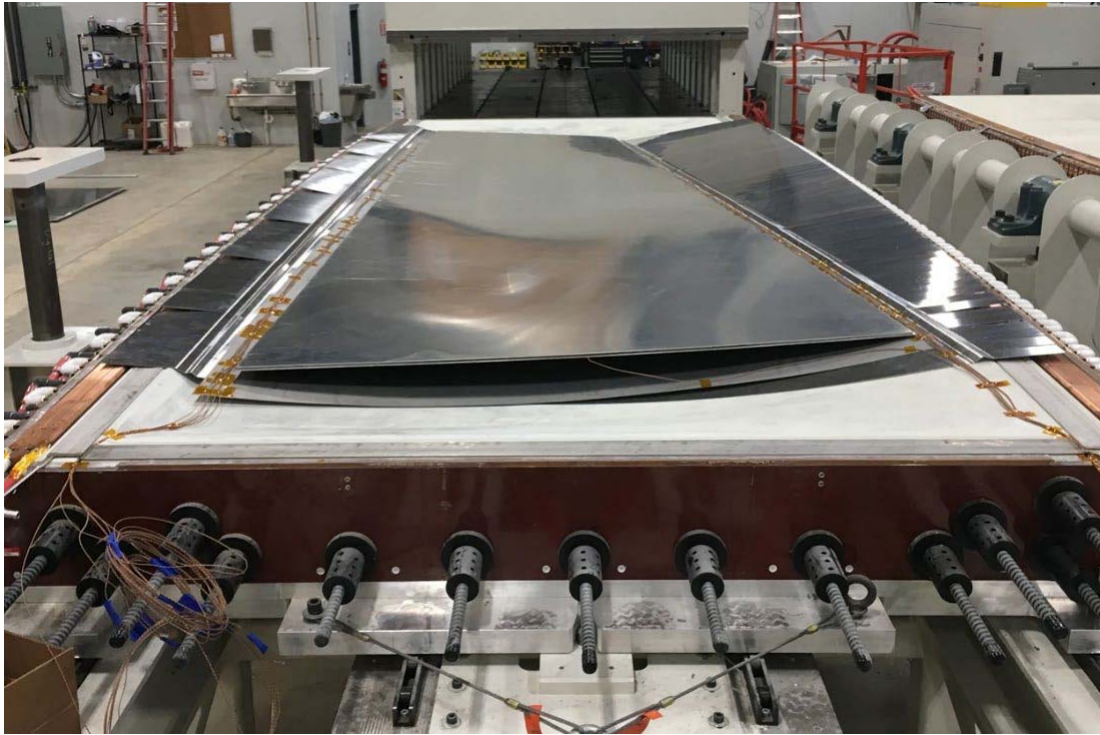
Pictures showing the aluminum sheets being used to simulate the part during the initial bladder forming cycle
